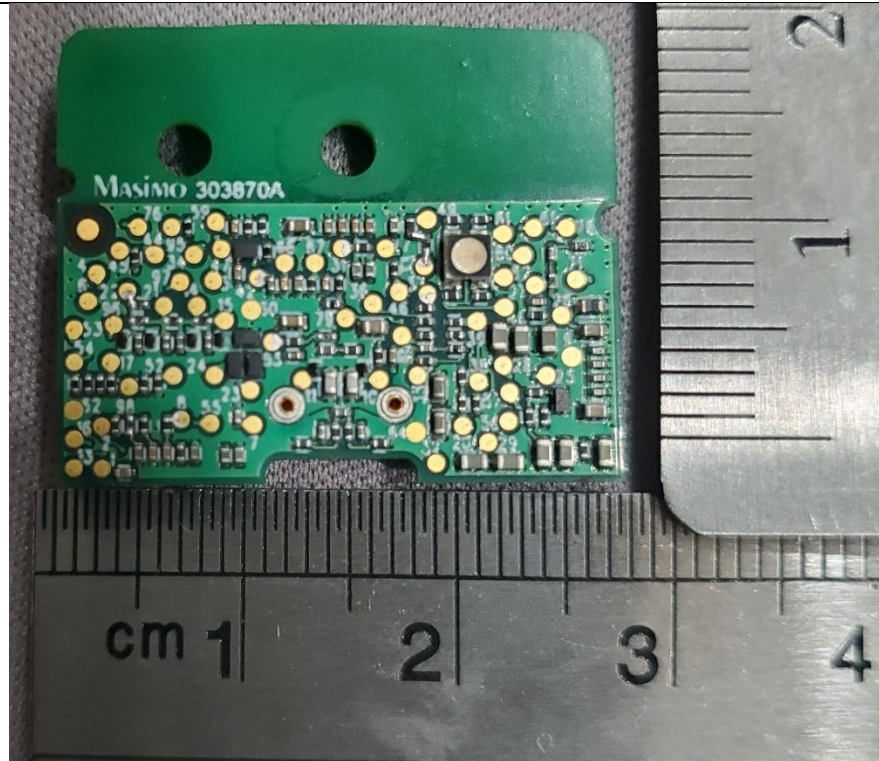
Assembly of back view of circuit board 29224 (p/n: 303870)
